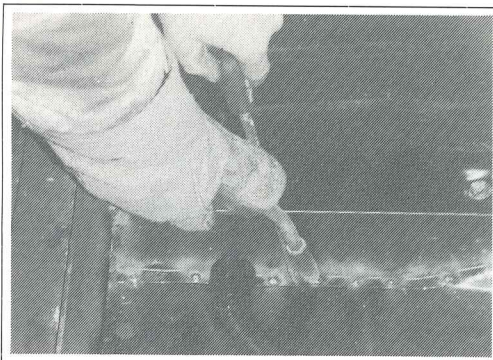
Before welding, align bolt holes and put bolts into position and tighten down. Plug weld into position. Watch wiring loom cut out position on box to floor recess.
